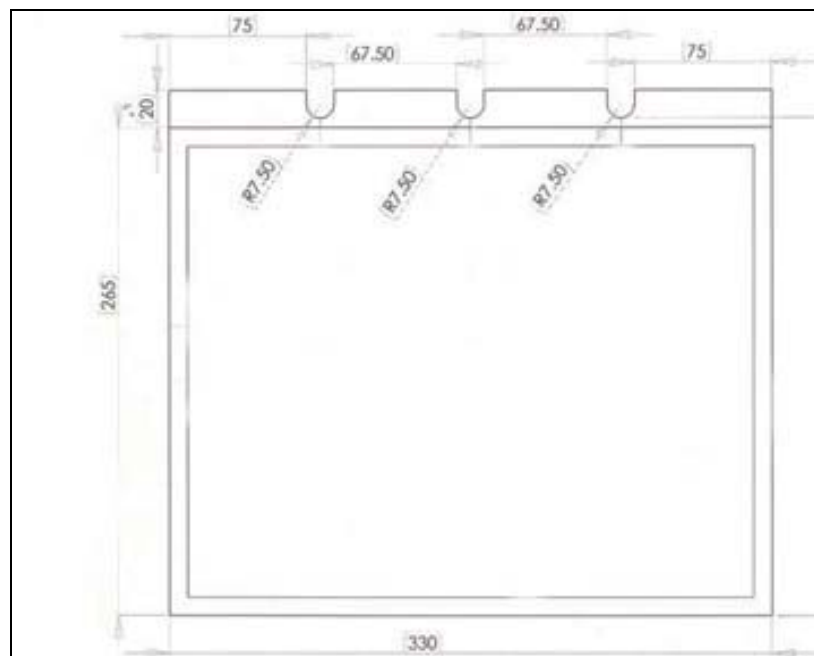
SolidWorks® drawing of a burst tray insert: top view.
